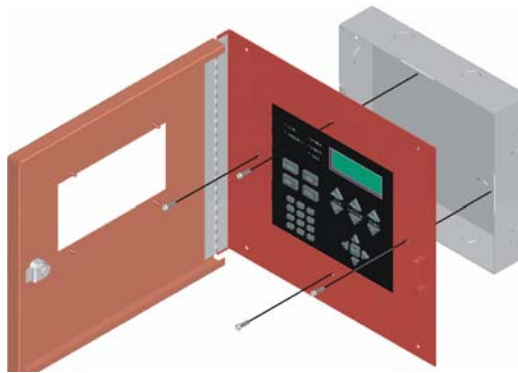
Attaching Annunciator/Door Assembly to Backbox
